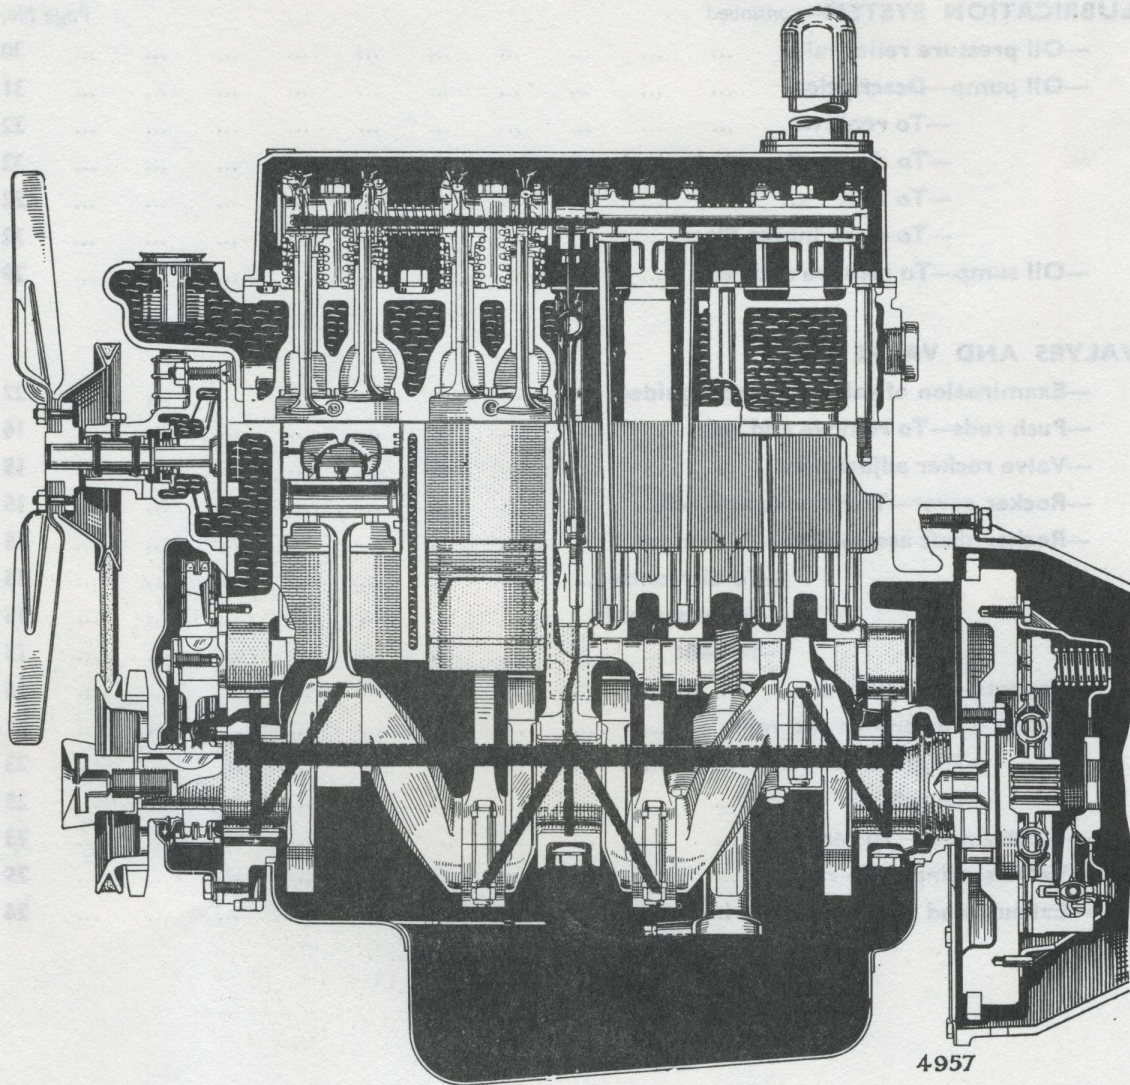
Engine—longitudinal section (1494 c.c. engine shown)
